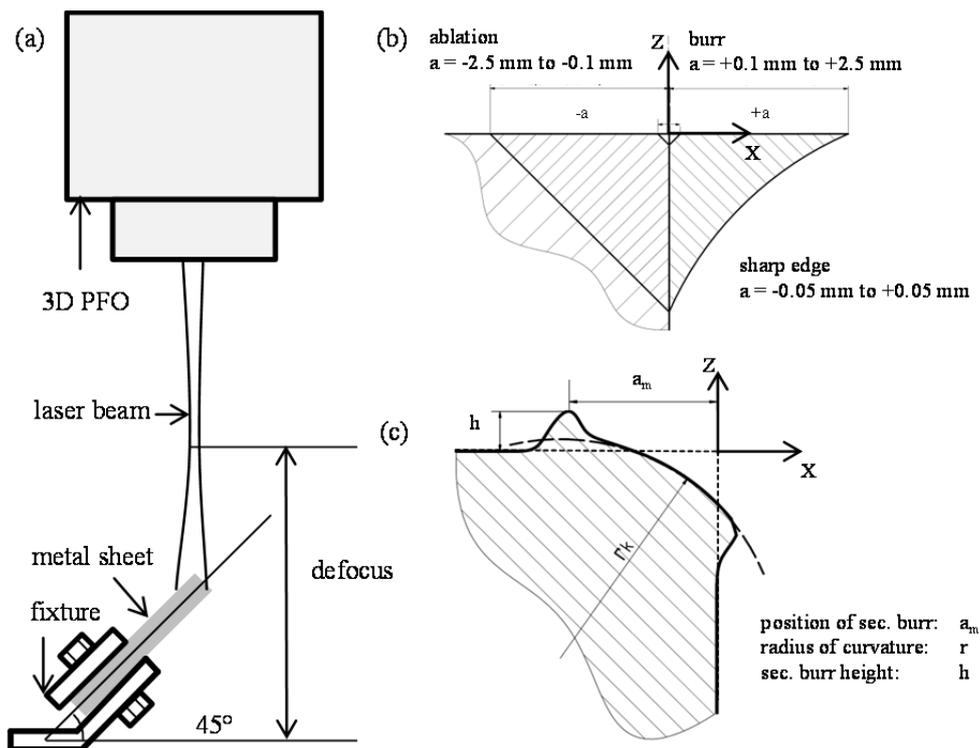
(a) deburring setup; schematic cross sections of burrs (b) before deburring (DIN ISO 13715) and (c) after deburring (Schmidt-Sandte 2002).
